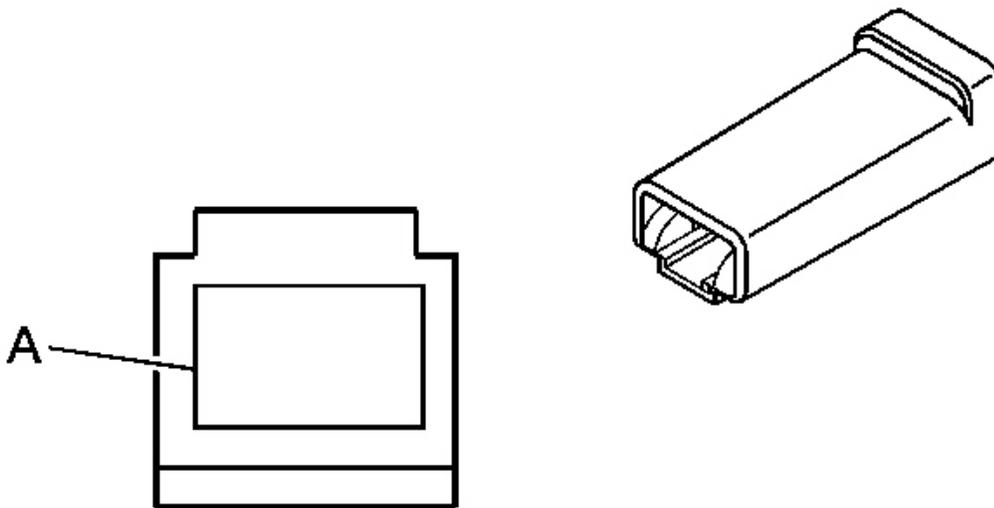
Head Up Display (HUD) Switch (UV6) Connector End View
